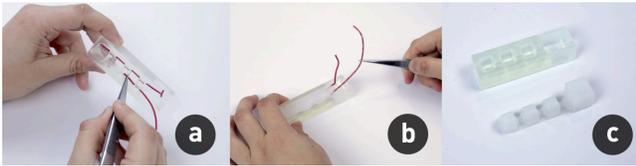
Fabrication process of the robotic fingers. a) channels are created by threading wires into the mold. b) after curing, the wires are pulled out to leave the channel open. c) final casted finger piece.
